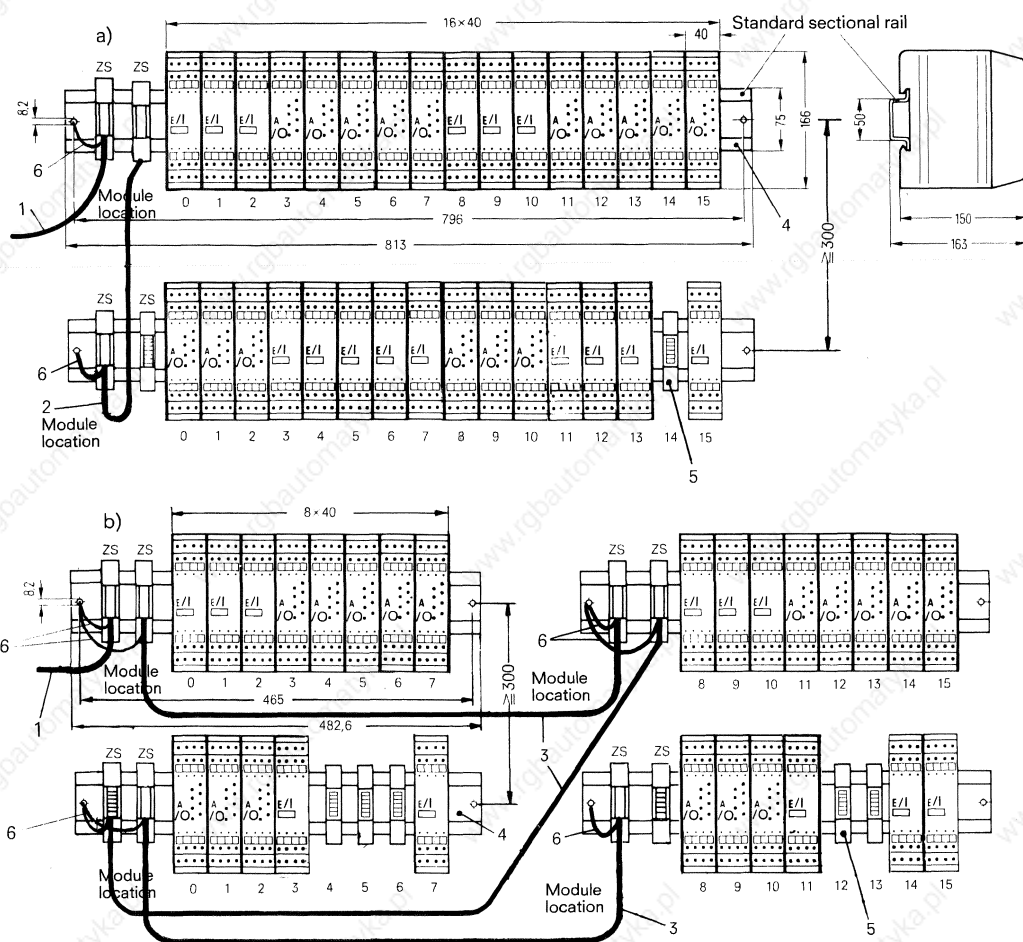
I/O module configuration for one CPU connector a) With extra-long mounting racks b) With short mounting racks
